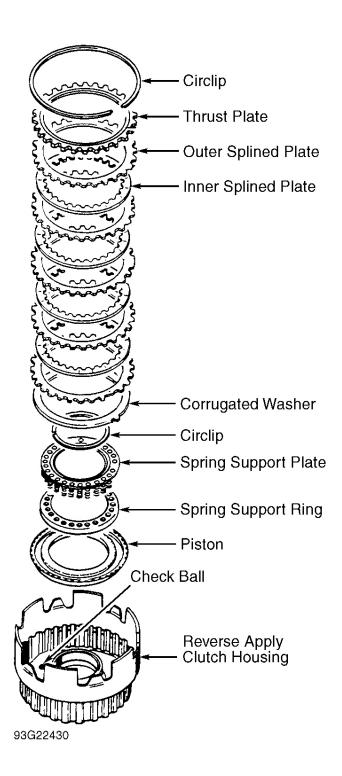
Exploded View Of Reverse Apply Clutch Courtesy of AUDI OF AMERICA, INC.
